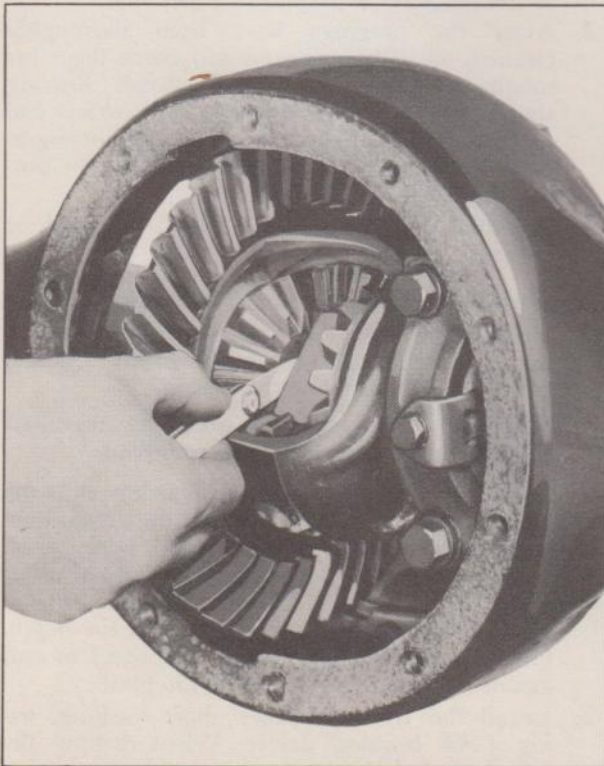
Checking Clearance Between Axle Shaft and Spacer
